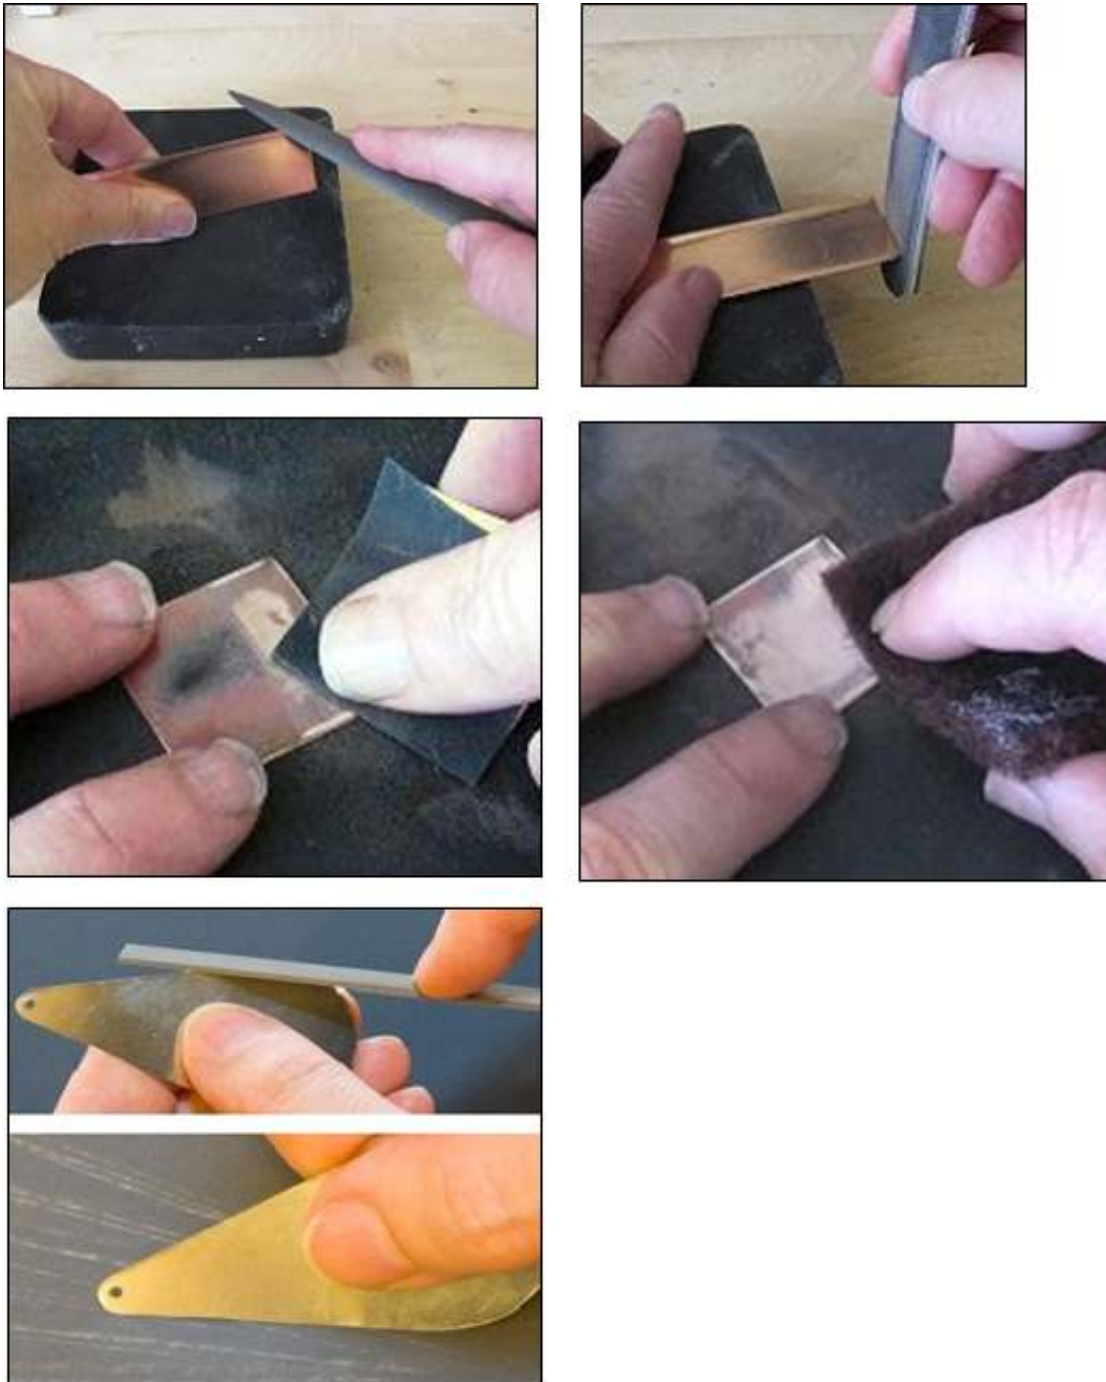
Filing and Cleaning of Metal Sheet
